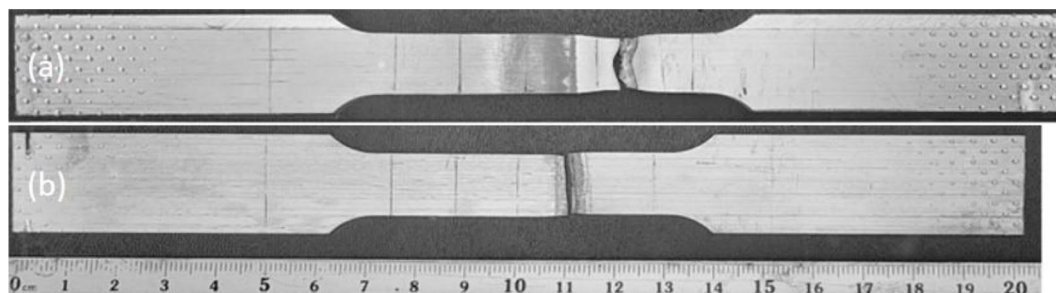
Tensile fracture morphology of T500 specimens: (a) skin, (b) fin
